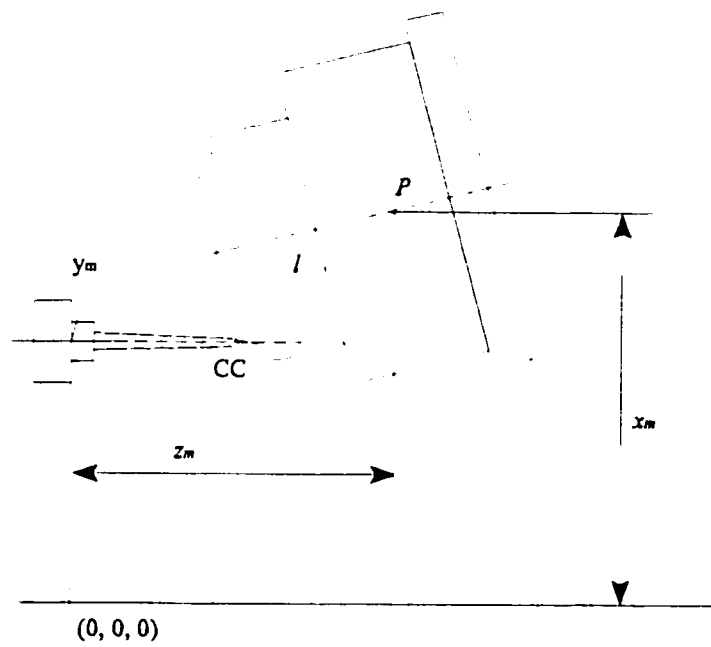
A Machining Position of the OM-1 Milling Centre
